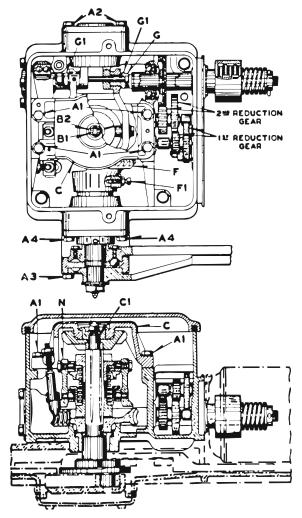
Sectional Views of M-23A Gear Box (Right-Hand Installation)
